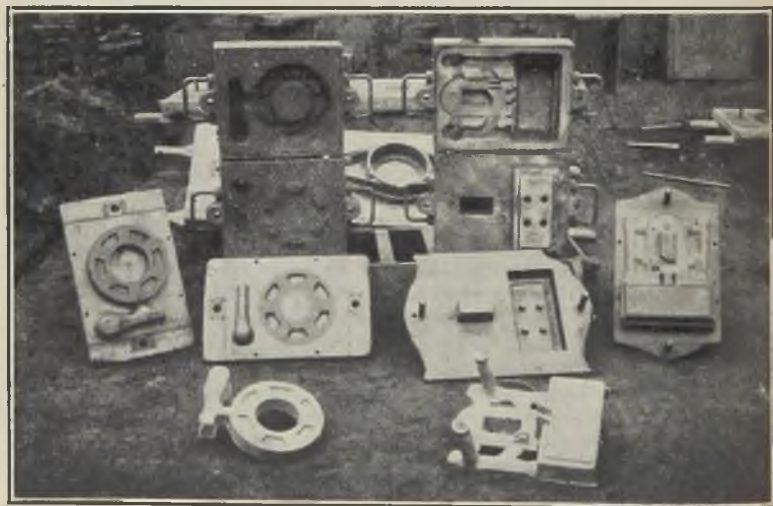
CASTINGS IN A.G.M. AND SLIP-RING ALLOY, TOGETHER WITH PATTERNS AND MOULDS.
